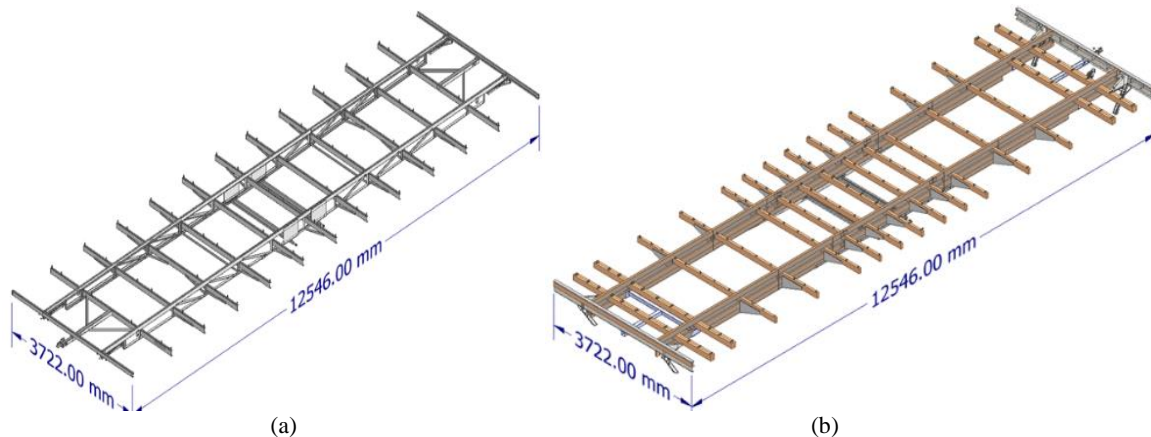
3D CAD model: a) datum chassis, (b) wooden chassis.
